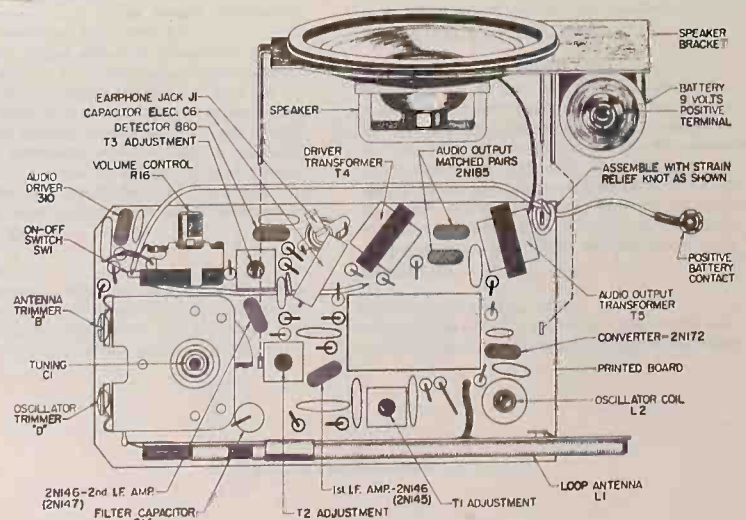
Top View Parts Layout with Speaker Raised from Board
